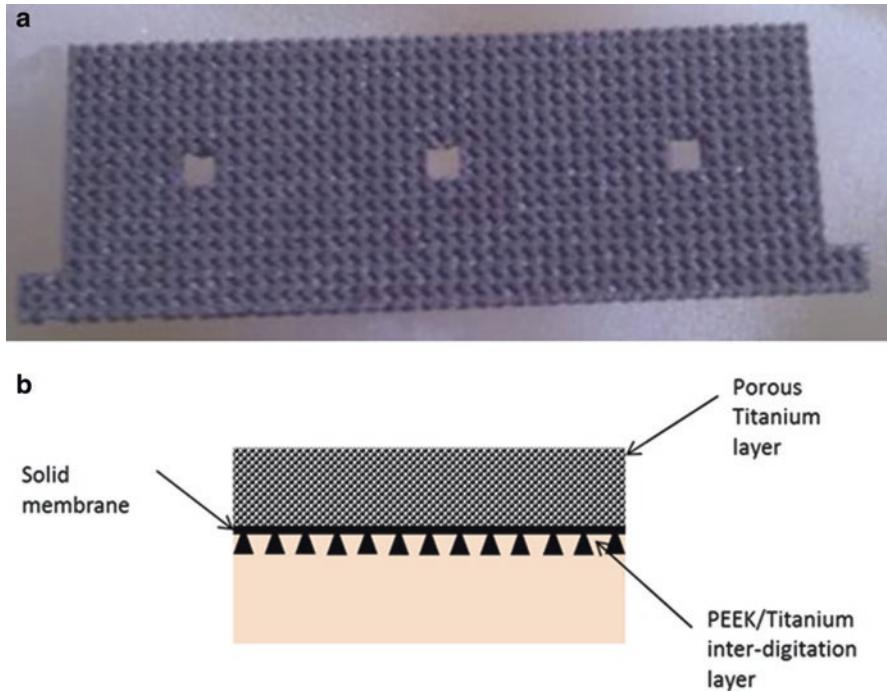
Manufacturing details of the PTC technology. (a) Single Ti6Al4V plate post AM processing and thermal treatment but prior to sectioning for final assembly. (b) Illustration of the PTC three-layered sandwich structure
